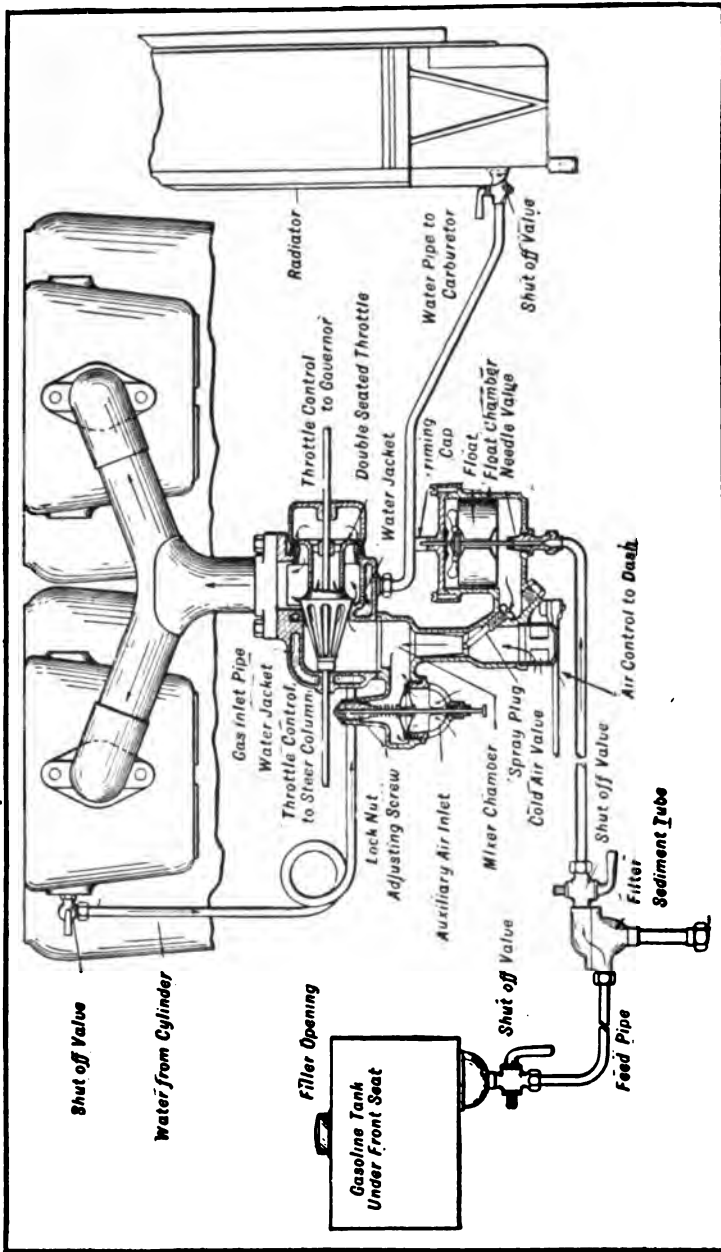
Complete fuel system used on some models of Peerless cars, showing method of supplying carburetor with fuel and joining it to cylinders.
